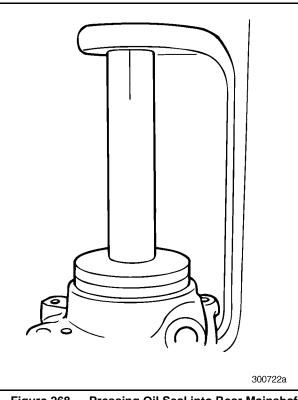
Pressing Oil Seal into Rear Mainshaft Bearing Cover
